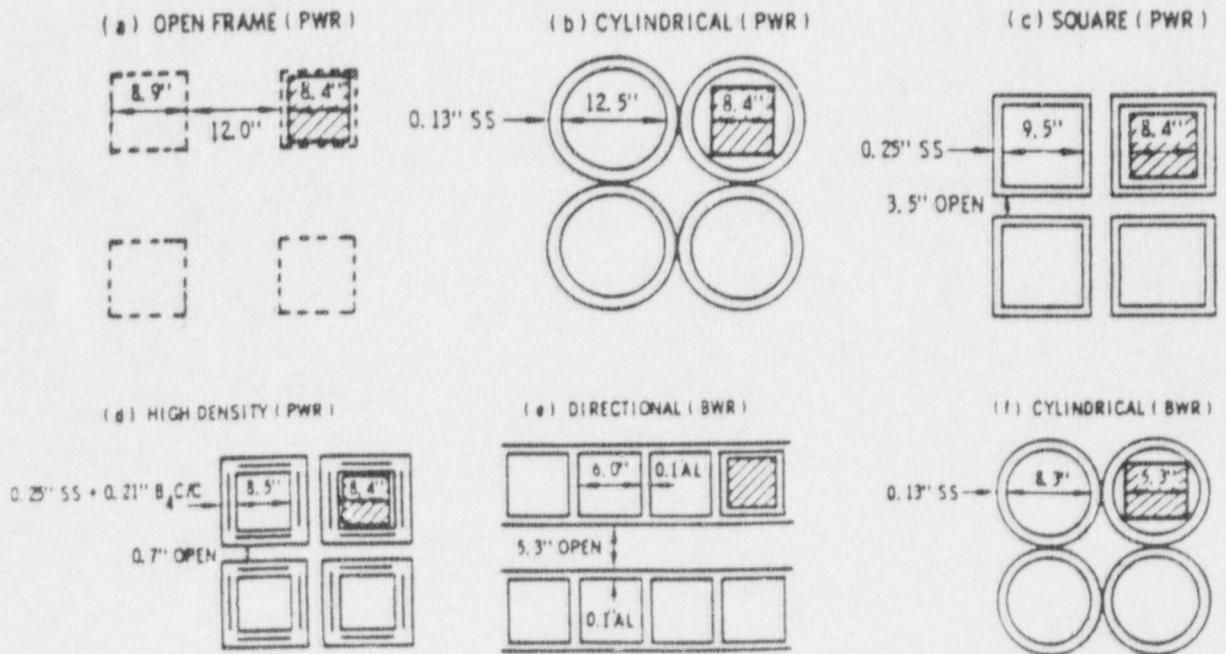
Cross Sectional Dimensions of Spent Fuel Holders Shown in Fig. 2.
